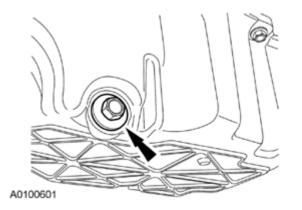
Locating Engine Oil Pan Drain Plug Courtesy of FORD MOTOR CO.
